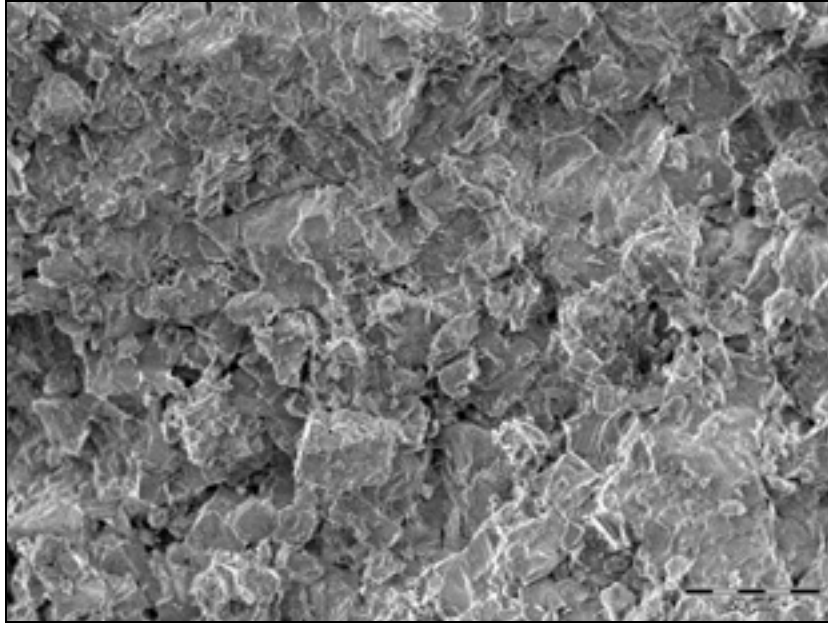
ESEM photo of fracture surface for type II.
